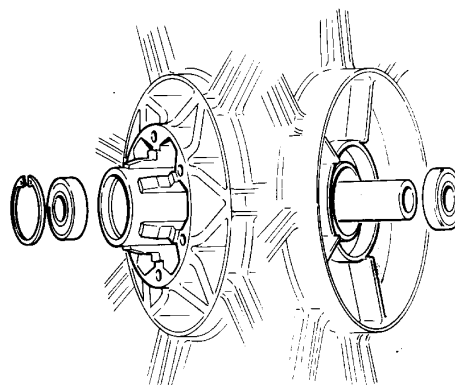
Removal and Refitting the Rear Wheel Bearings.
